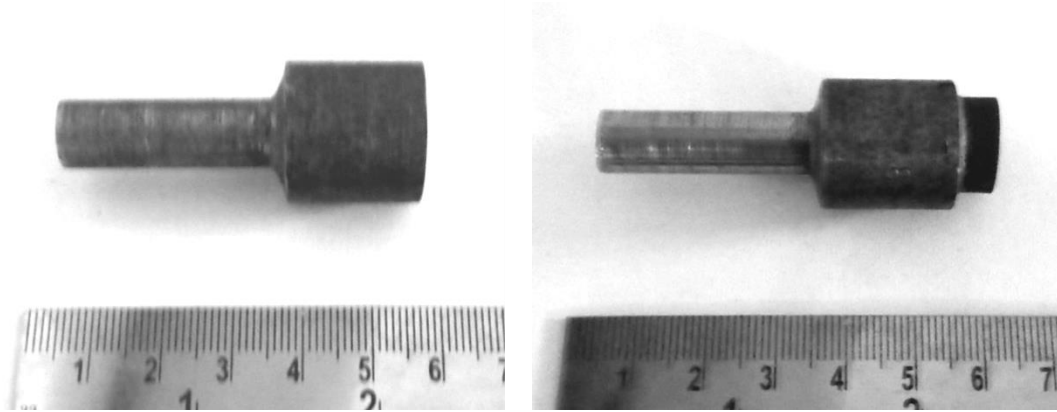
Tool electrode extension before and after joined with powder compressed pellet
